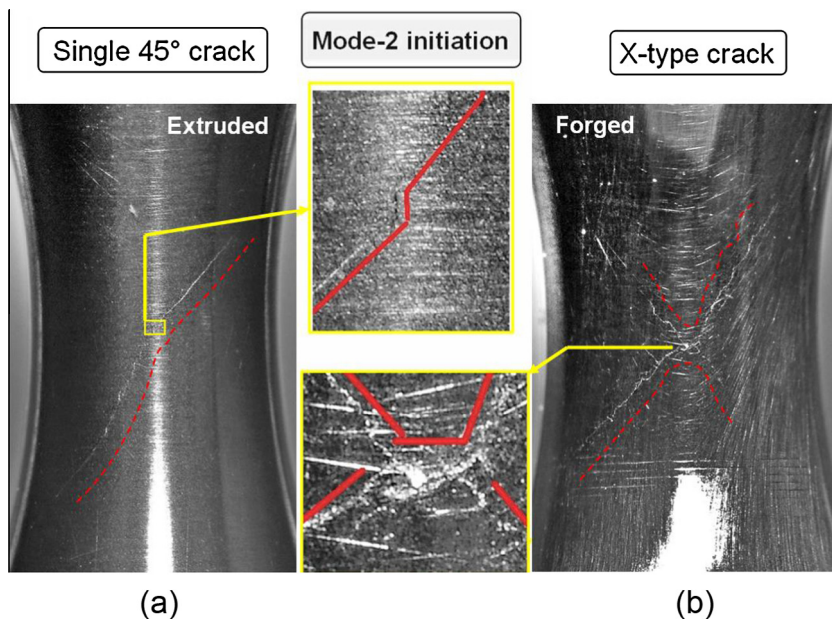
Surface crack path (optical microscopy) on (a) extruded and (b) forged VT3-1 Ti-alloy.
